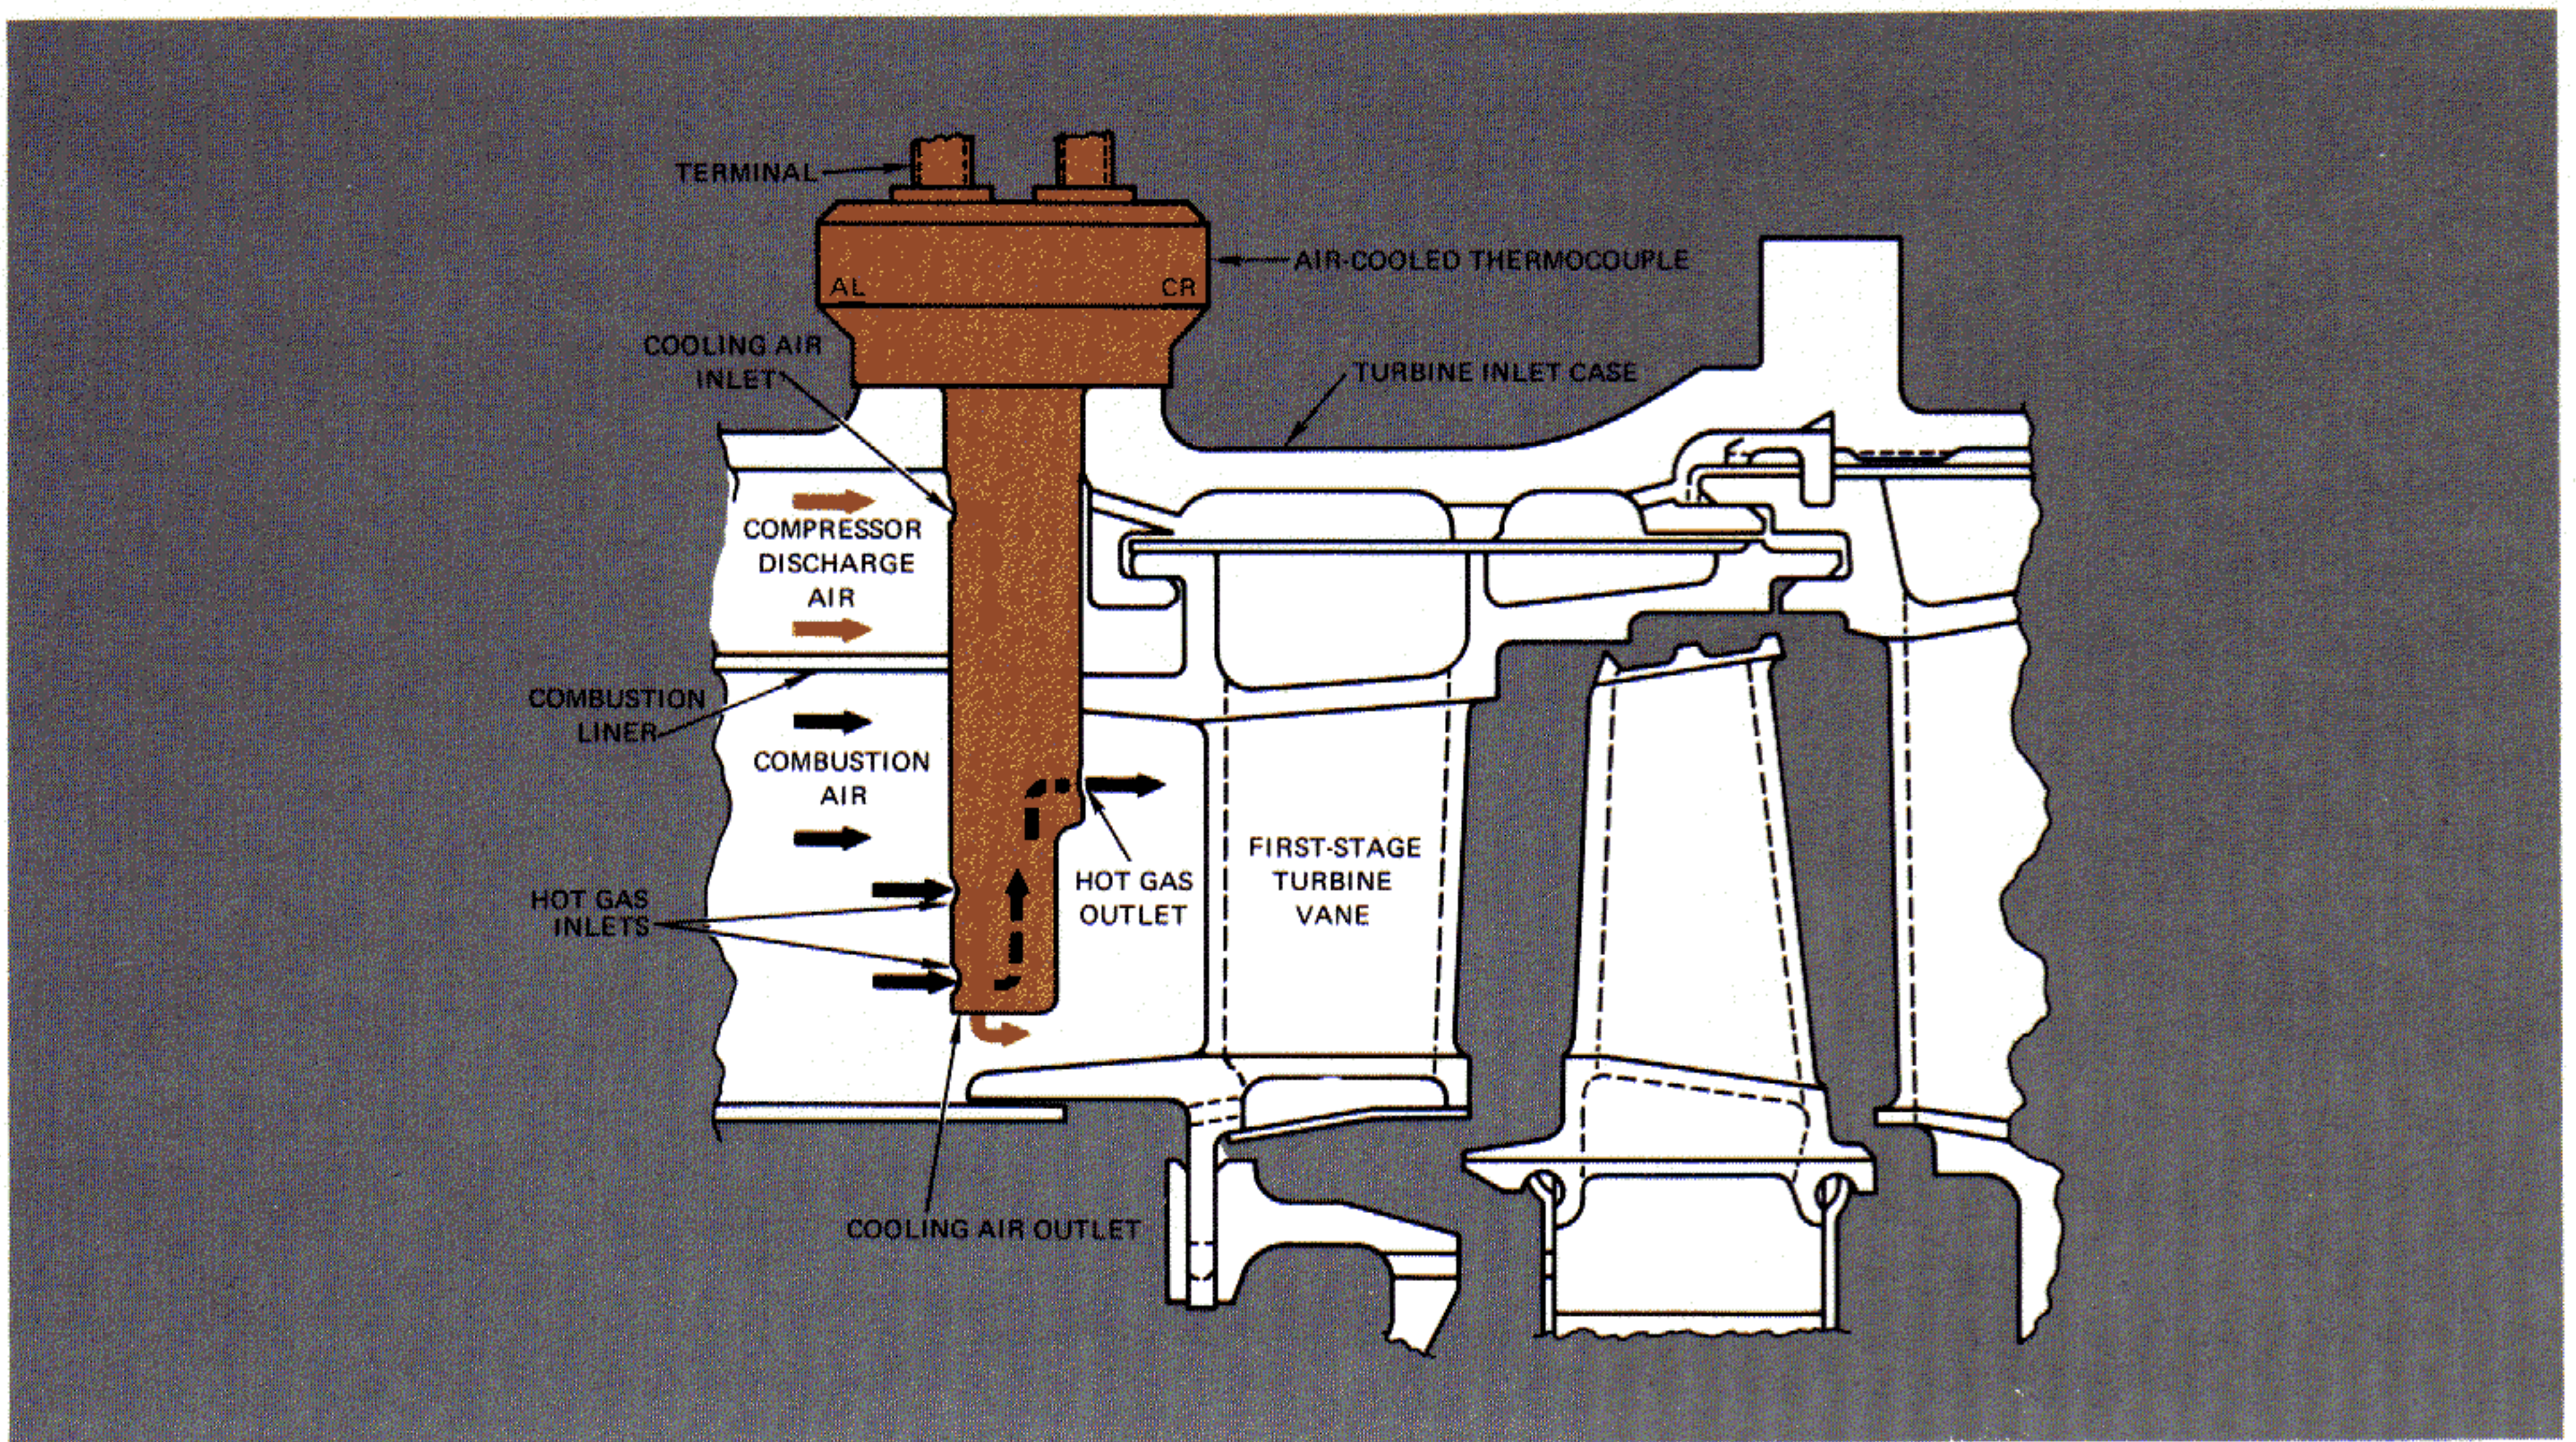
Location of Typical Thermocouple in T56-A-14 Engine Turbine Inlet. Location of Thermocouples in T56-A-10WA Engine Turbine Inlet is Similar.
